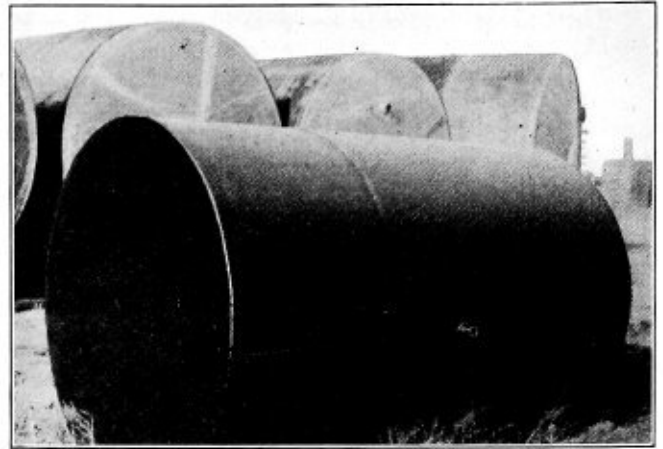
Welded tanks present nearly as smooth a surface as solid metal
